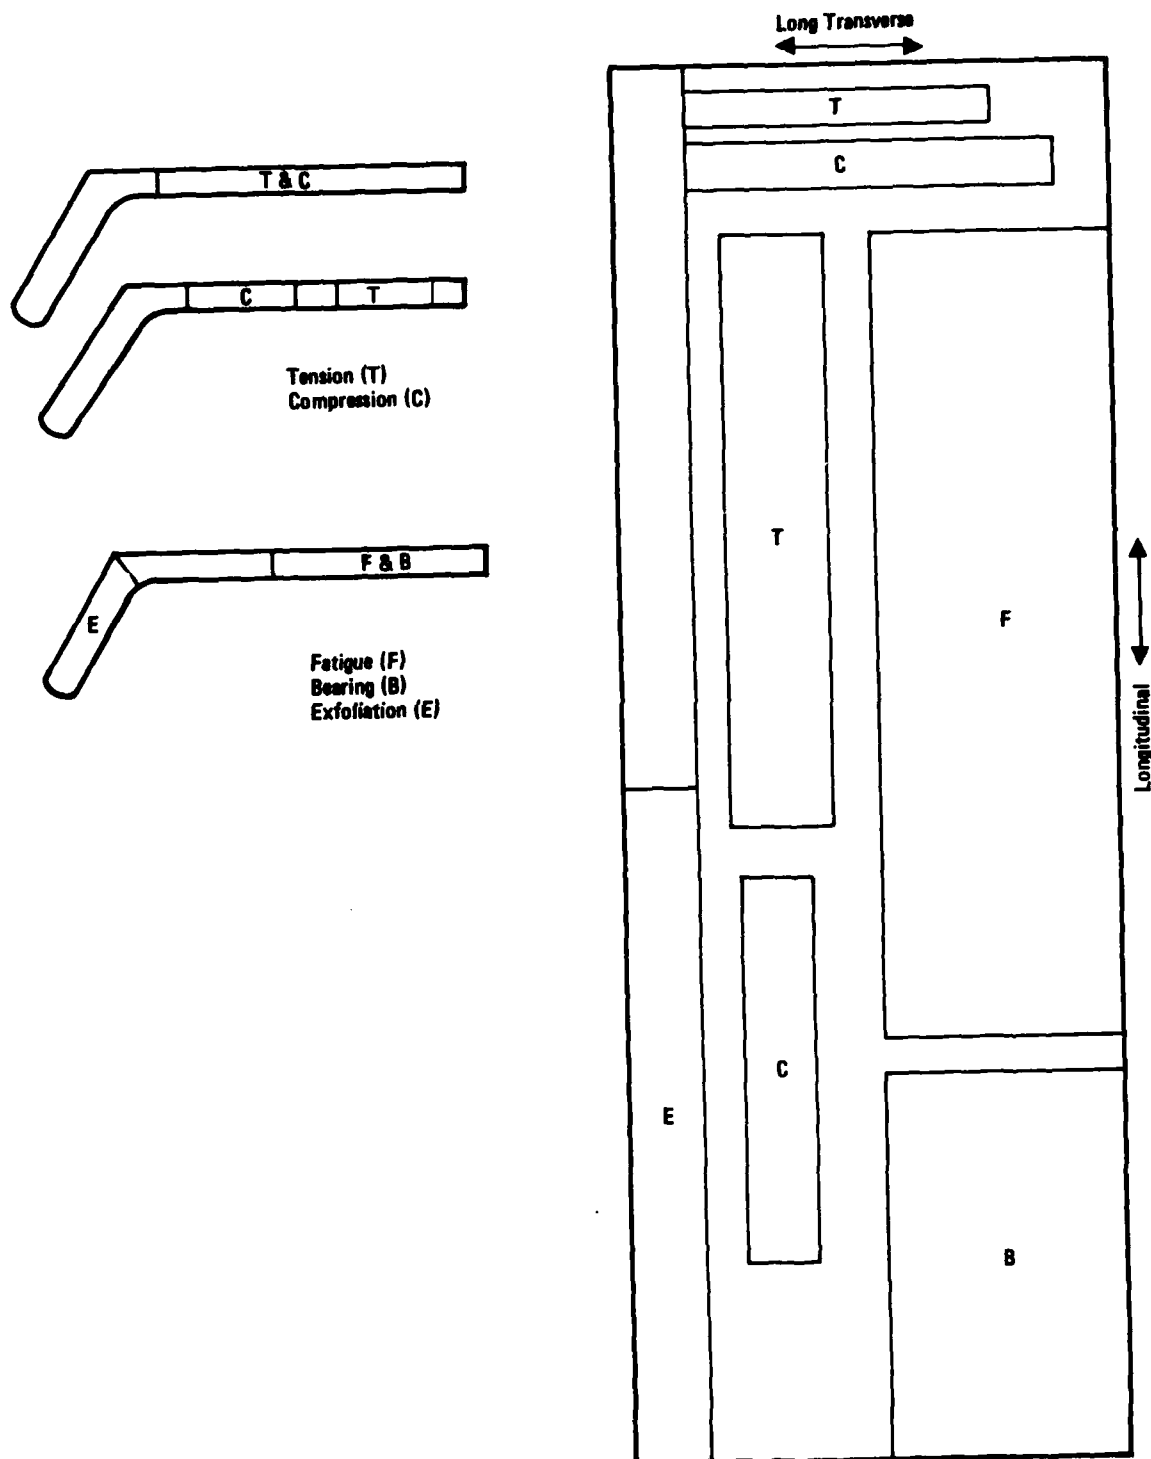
Schematic of test specimen layout for flanged cap - flange, LS 13116. (Not to scale)
